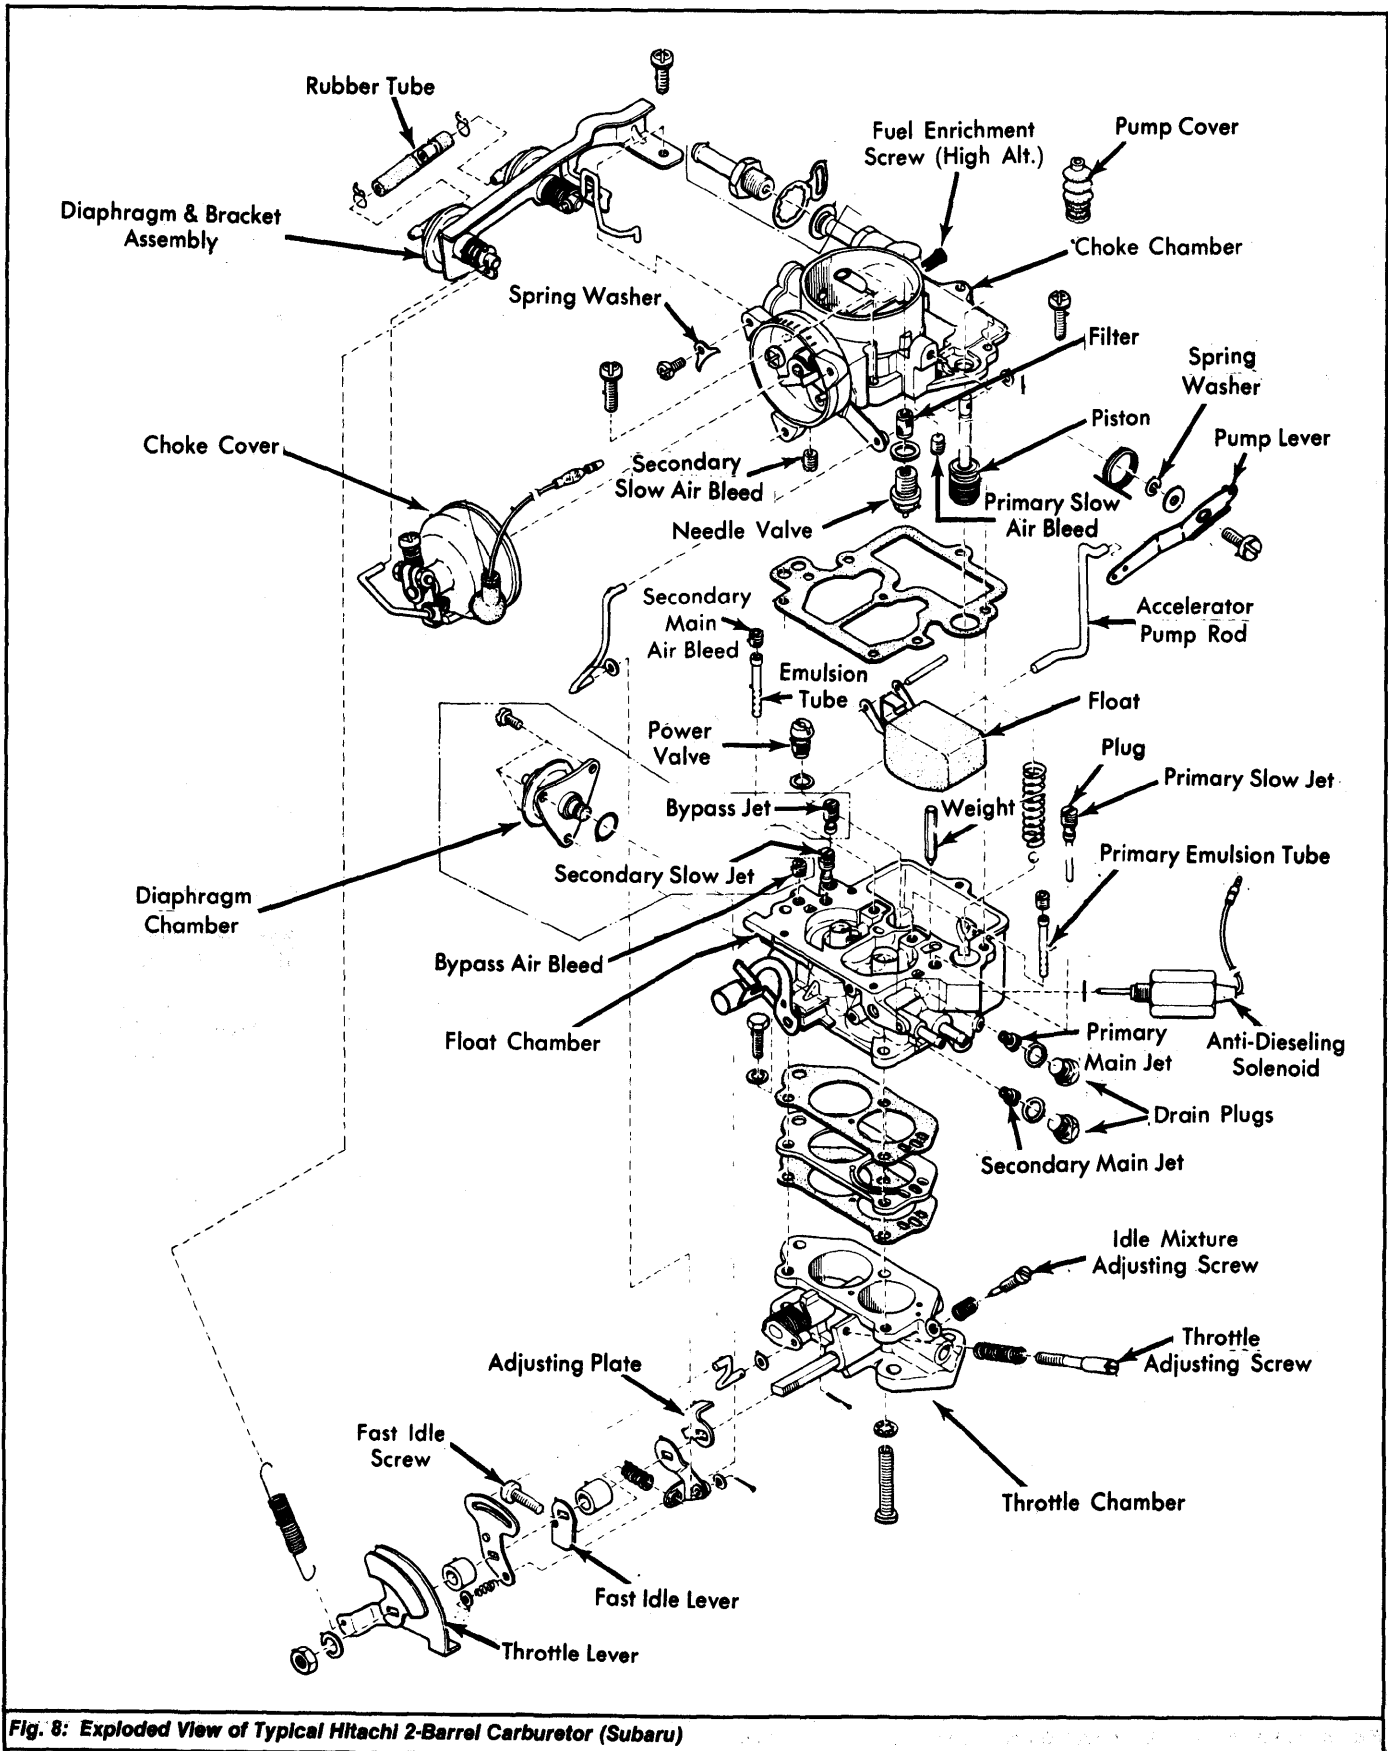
Exploded View of Typical Hitachi 2-Barrel Carburetor (Subaru)
